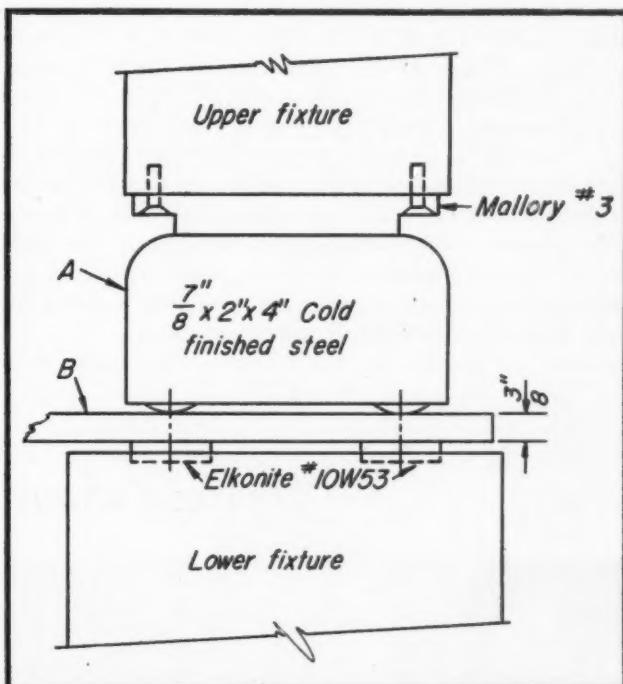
Above—Base in welding fixture showing position of welding contacts with respect to projections on block A
